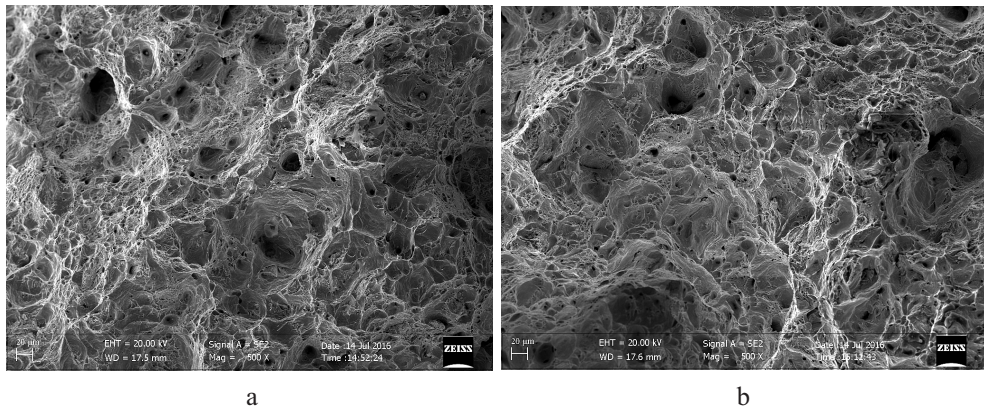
Tensile shear fracture morphology of stainless steel composite plate: specimens of 5 (a) and 8 mm (b) clad plate.
